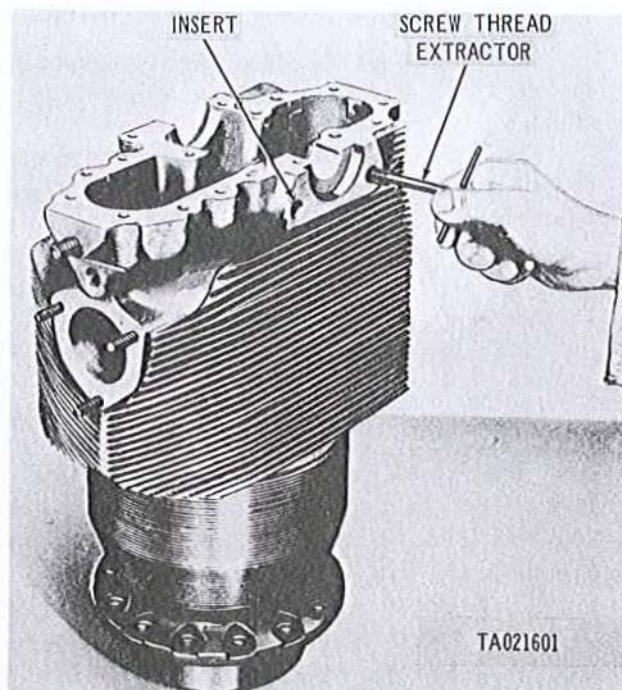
Removing helical-coil threaded insert from cylinder assembly using screw thread extractor.
